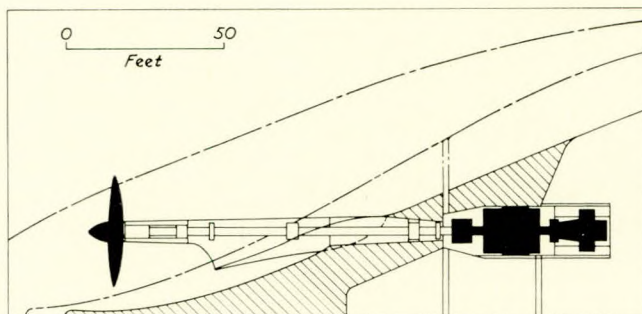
Arrangement of single-cylinder turbine machinery in a twin-screw tanker
